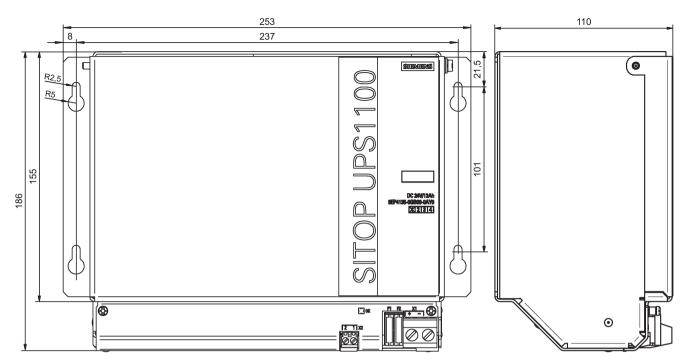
Dimension drawing 6EP4135-0GB00-0AY0
